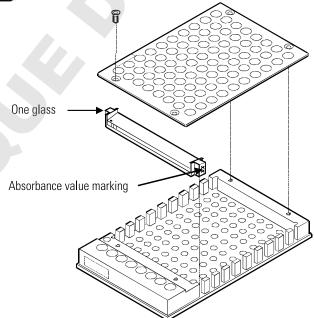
Assembly drawing of the Multiskan Verification Plate
